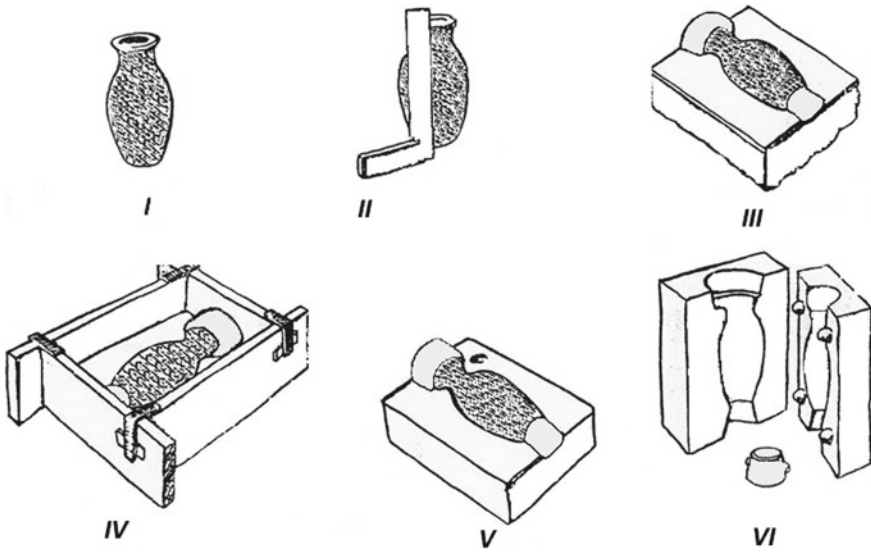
Sequence of plaster mold preparation for a pot to be shaped by slip casting
